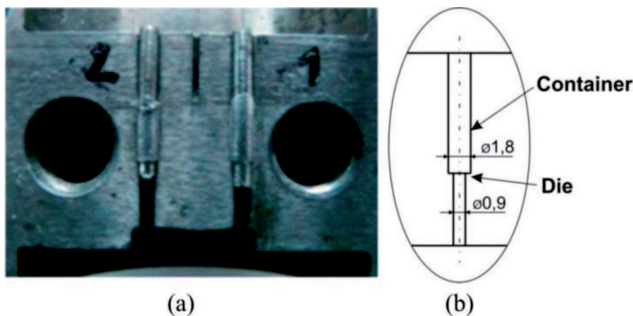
Tool for microextrusion: a) view of extruded samples; b) container and die dimensions
